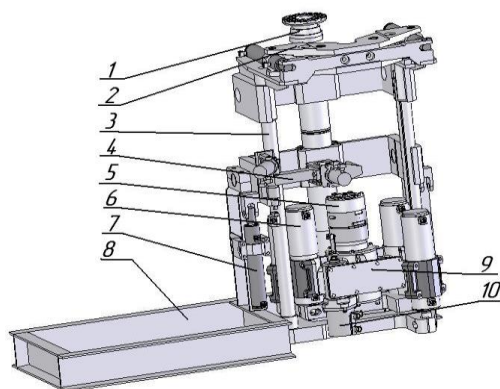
Drilling assembly: 1—leg; 2—crown runner; 3—rotating frame; 4—manipulator mechanism; 5—tool-joint; 6—rotation cylinder; 7—rotation cylinder; 8—frame; 9—reducing gear; 10—fluid-power motor.
